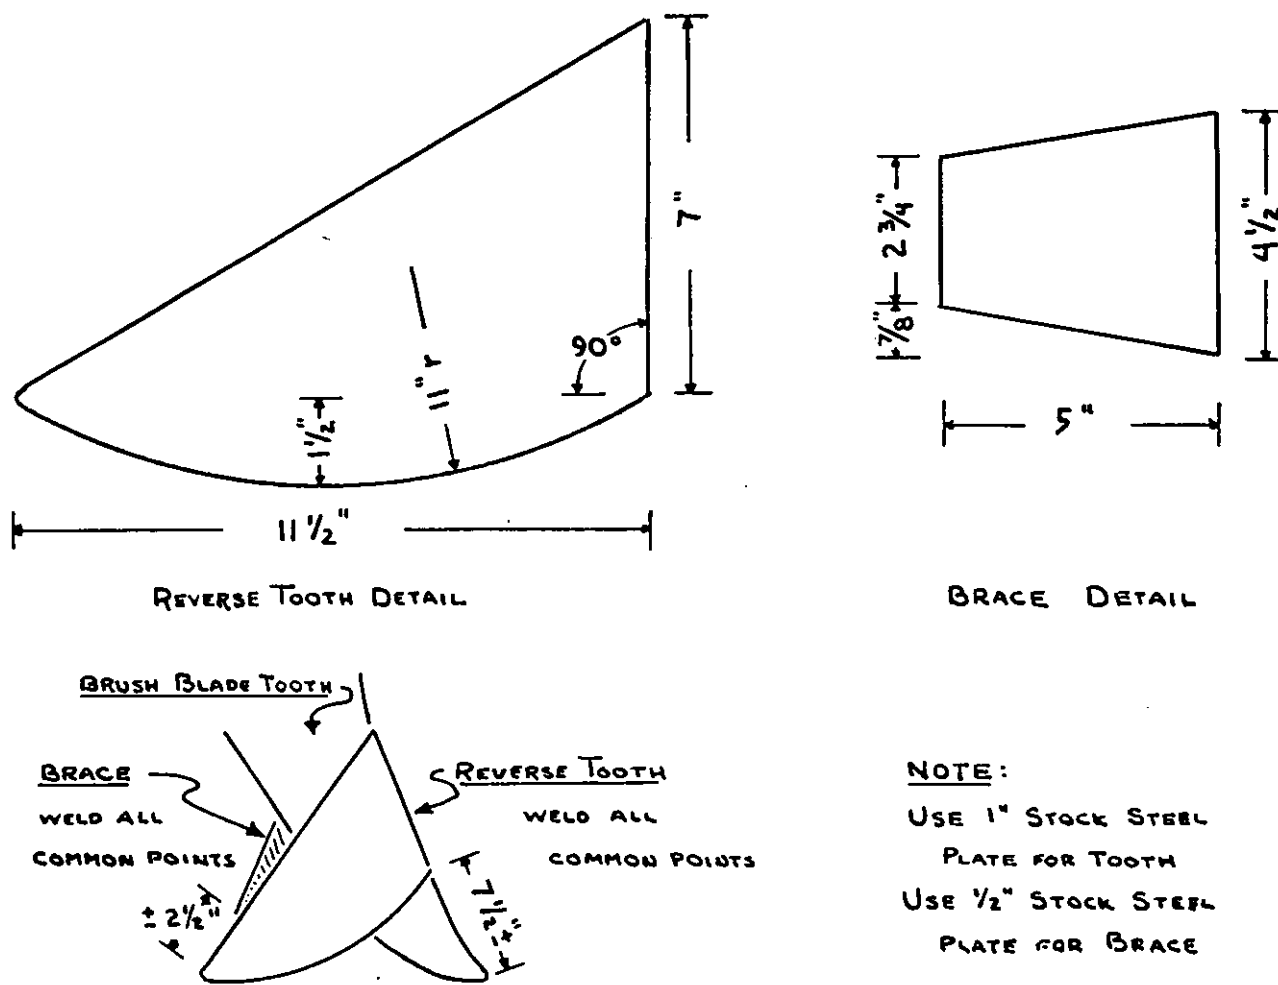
Fabrication details of reverse tooth and brace are shown. The brace is welded to the reverse tooth and the opposite side of the brush blade tooth.
